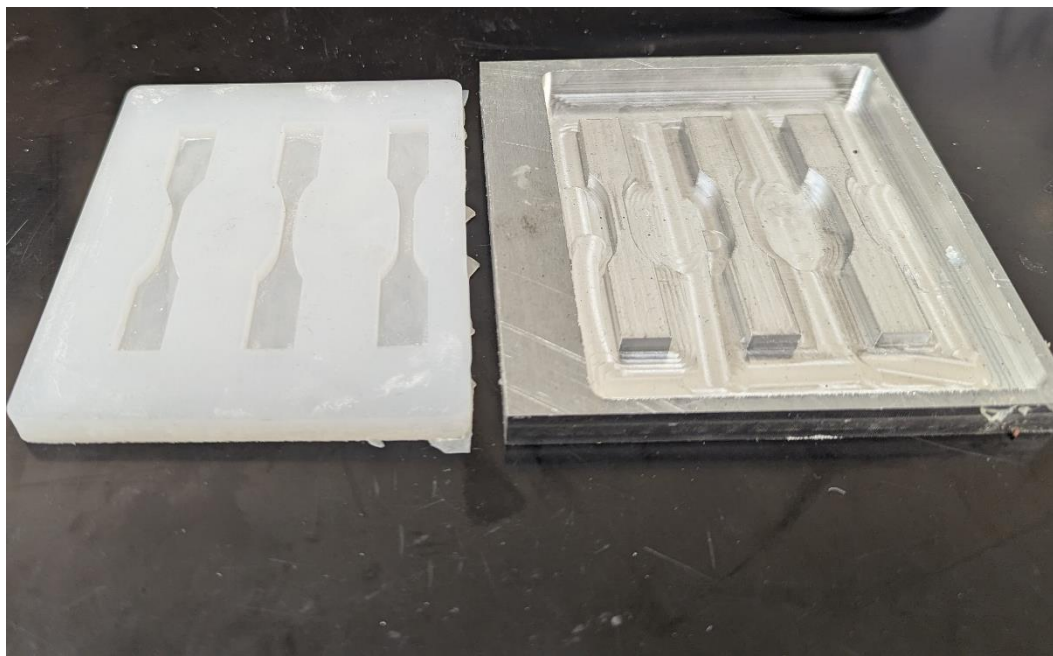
Silicone mold (left) and Aluminum reverse mold (right)
